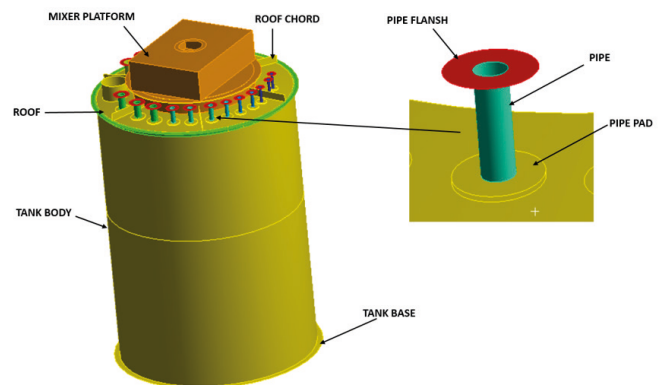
3D geometry and parts of HX62-CM002 tank
